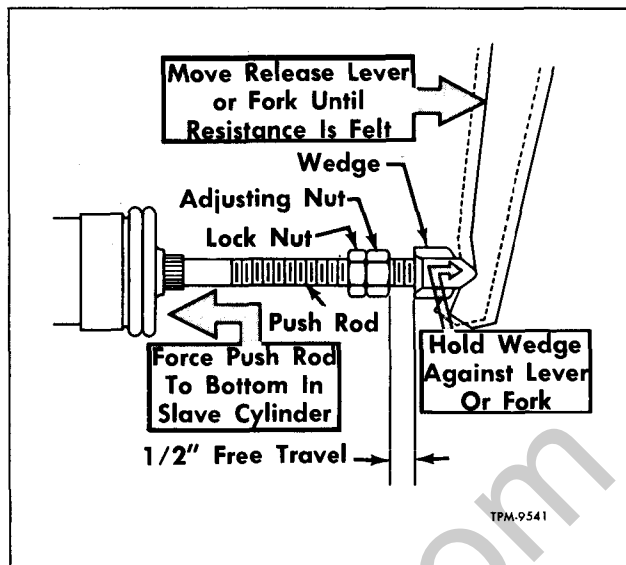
Slave Cylinder Push Rod Clearance (Except HN, JN 90 with Spicer Clutch)
